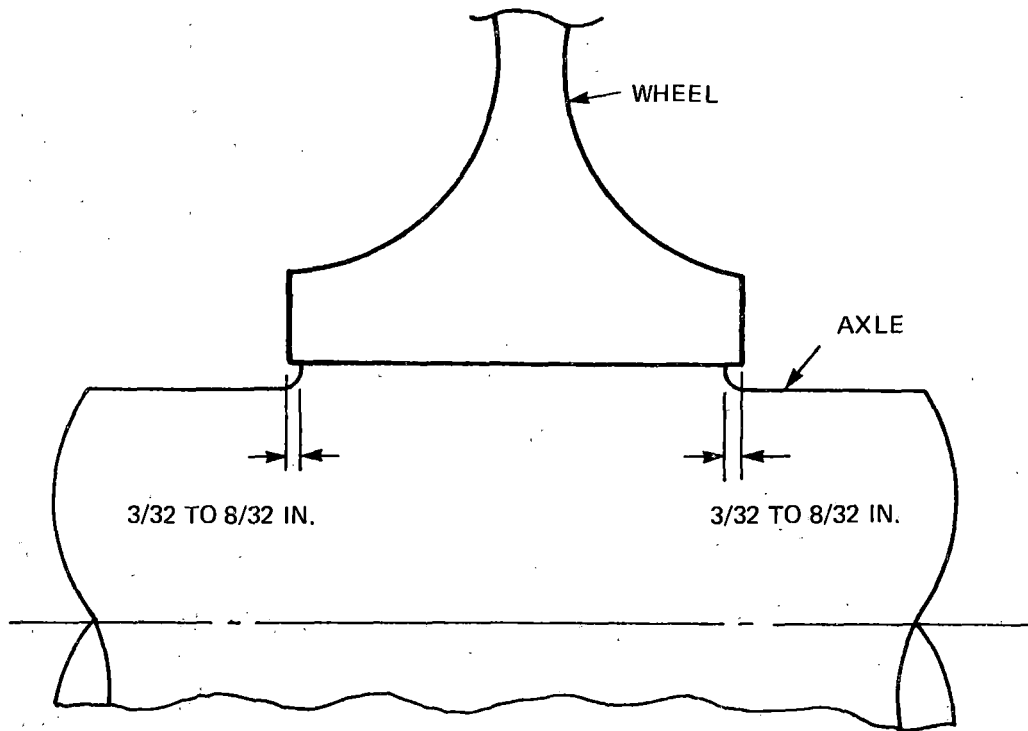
TGV WHEEL-AXLE ASSEMBLY HUB OVERHANG
